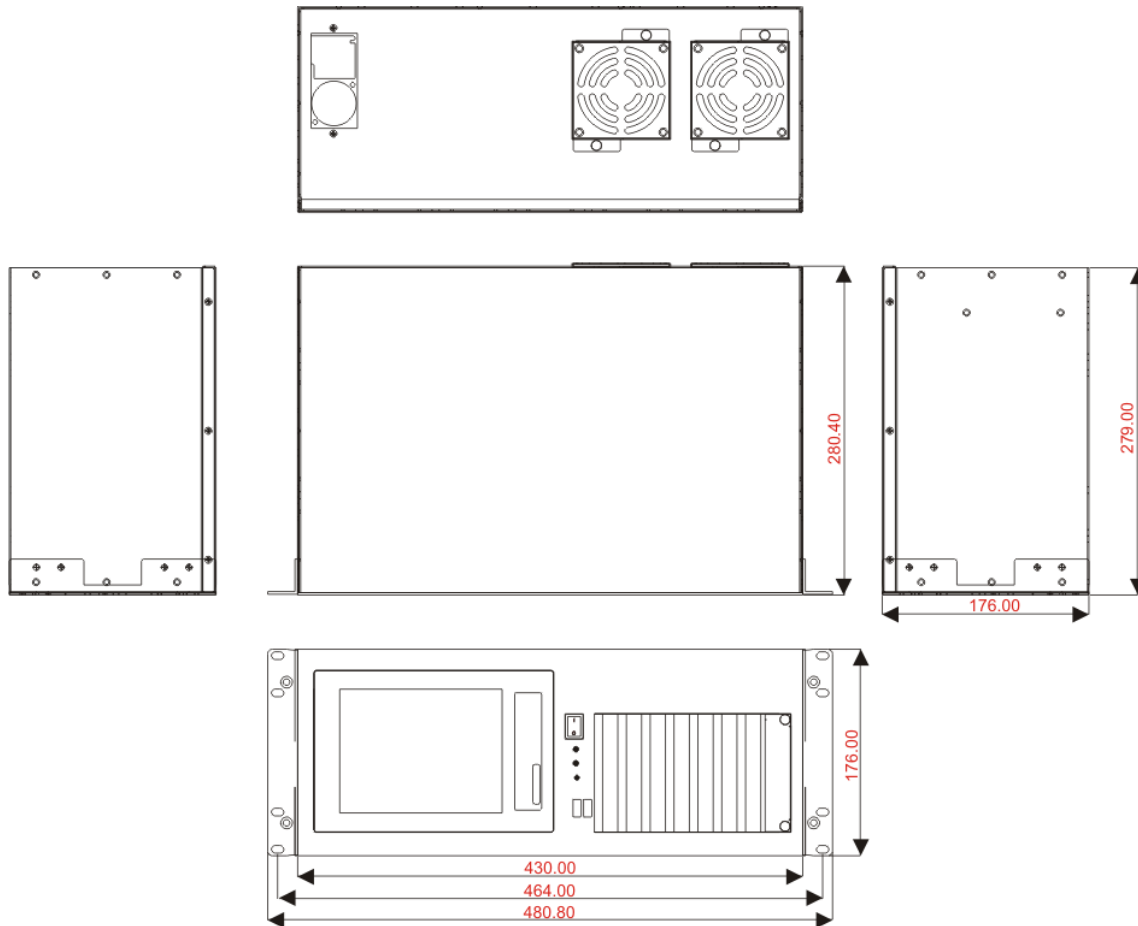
RPC-6106 Physical Dimensions (millimeters)
